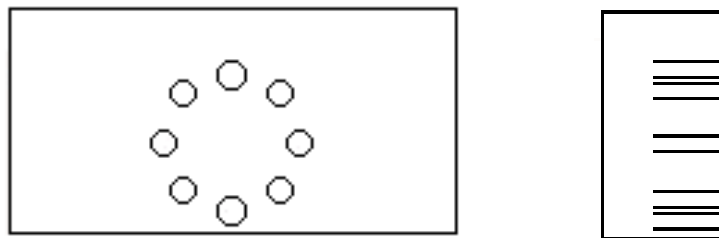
Sketch of 8 Port Injector Face Plate Front and Side Views
